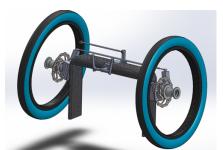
A preliminary CAD model of the selected idea that incorporates the U-shaped steering wheel and solid linkages.
